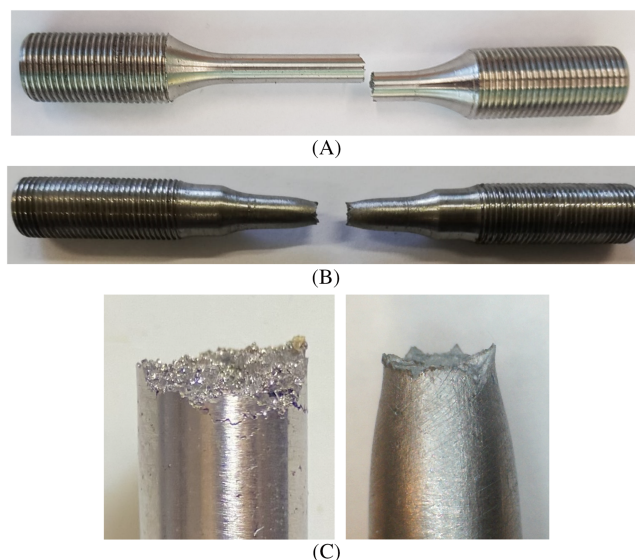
Uniaxial tensile specimens: (A) selective laser melting (SLM) (B11), (B) conventional (A14), and (C) detailed view of fracture surfaces—SLM and conventional, respectively [Colour figure can be viewed at wileyonlinelibrary.com]
